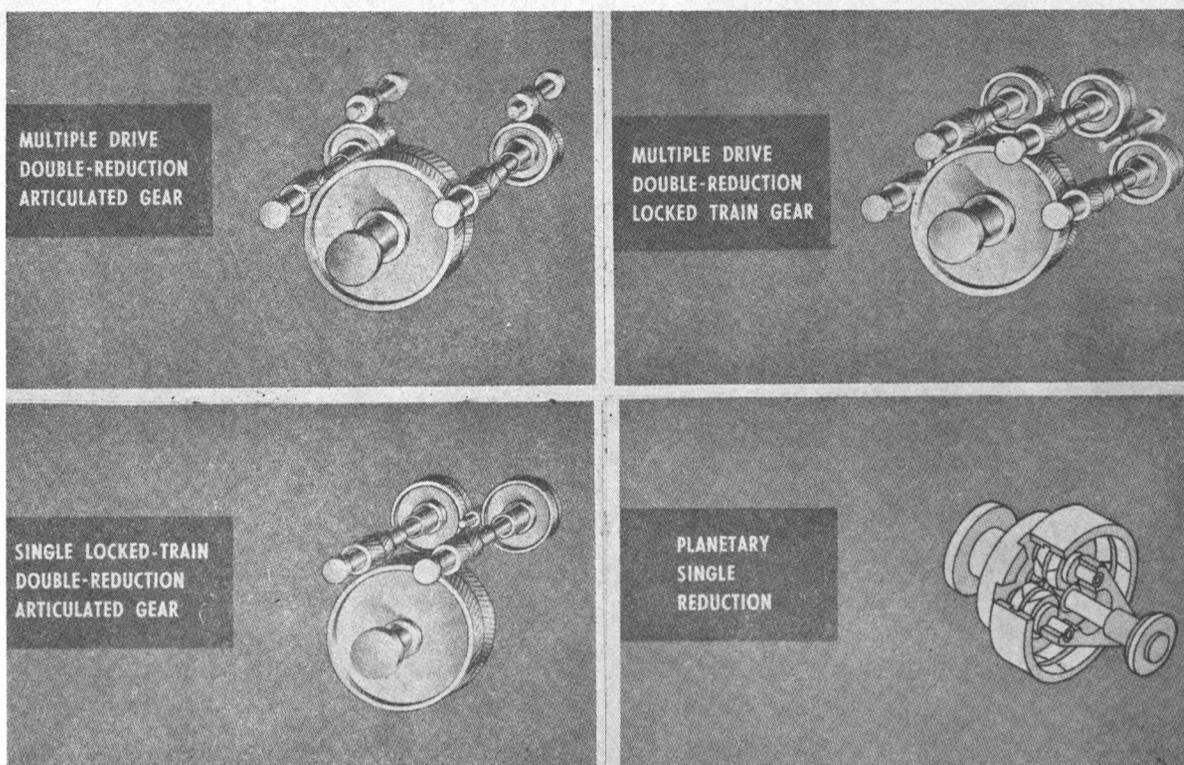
Basic gearing arrangements which have evolved to accommodate both single and multi-cylinder steam turbines.
